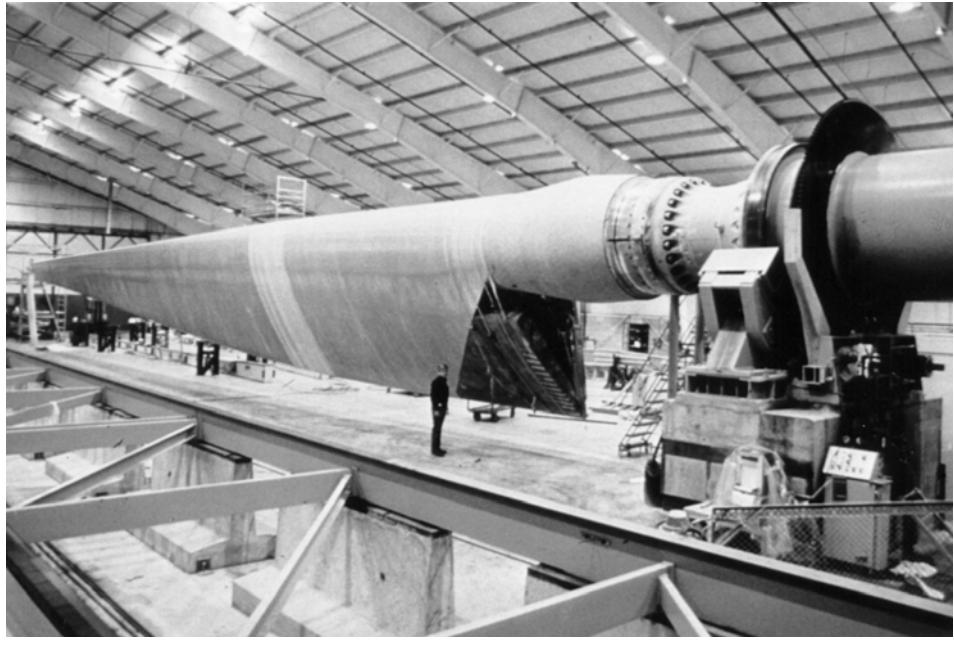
Rotor blade of the WTS-3 turbine on the winding machine
